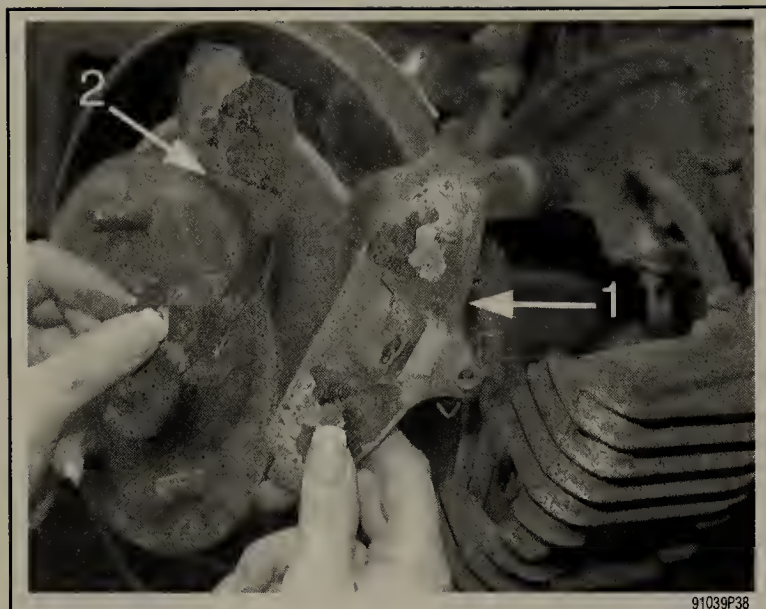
Remove the outboard brake pad (1) and shim (2) . . .
